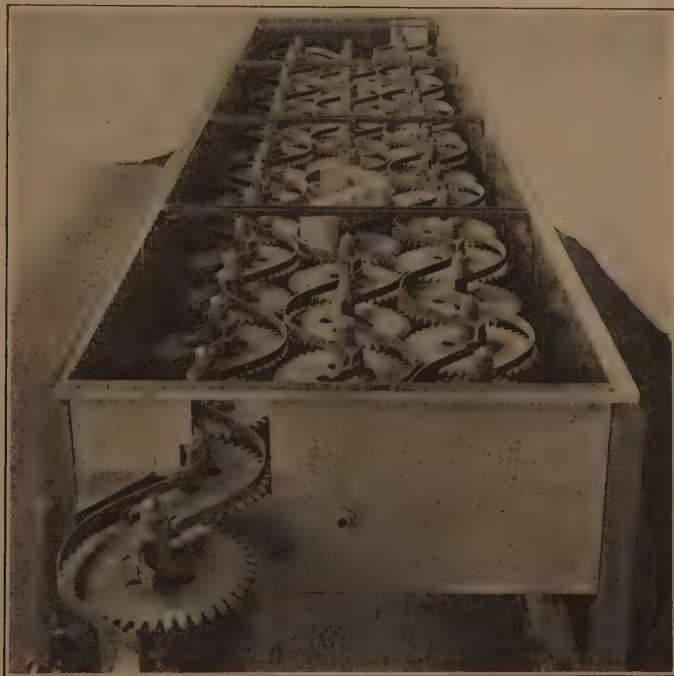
Hawkins exhaust box with lid removed to show method of conveying cans. (Courtesy, Anderson-Barngrover Mfg. Company).
